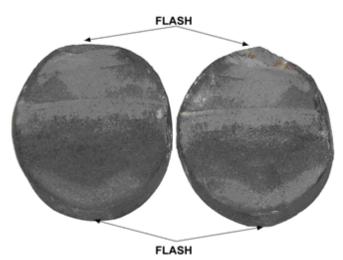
Fracture surfaces of chain bracket. Slika 2. Površine preloma spojnice lanca
